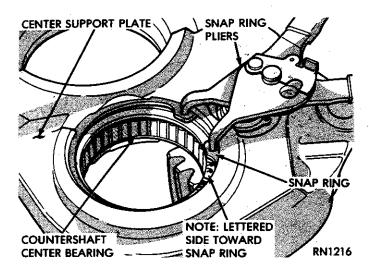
Removing/Installing Countershaft Center Bearing Snap Ring
